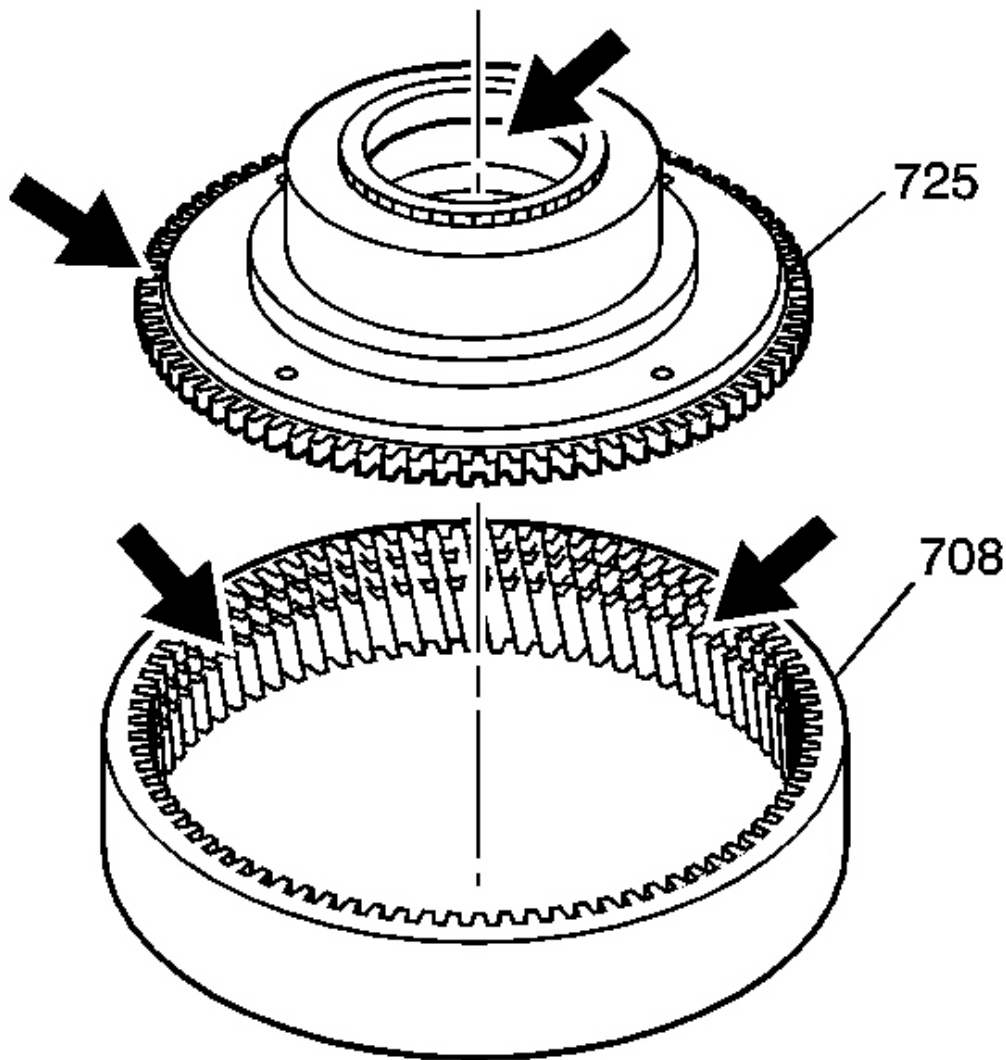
View Of Input Internal Gear Flange & Bushing Inspection Areas
